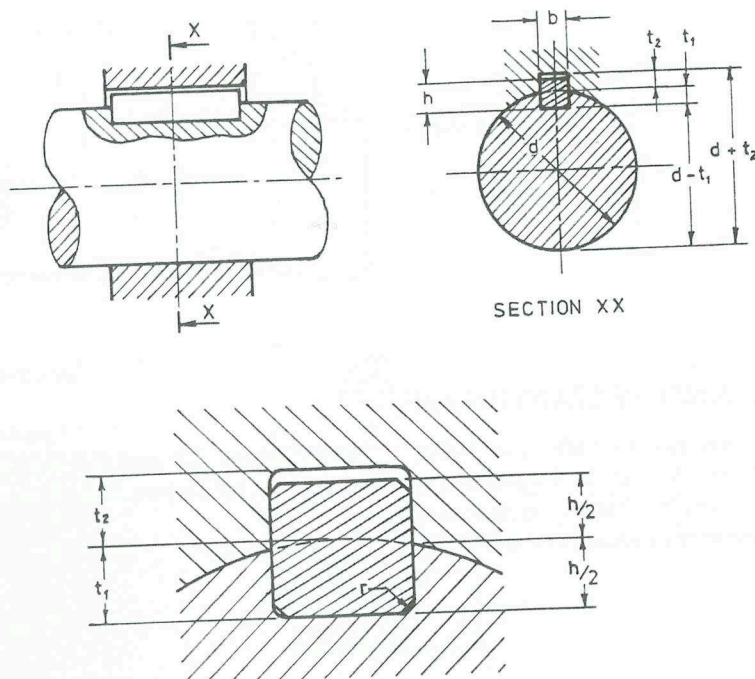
Enlarged detail of square key and keywaysTABLE 2.2 Dimensions and tolerances for square parallel keyways
